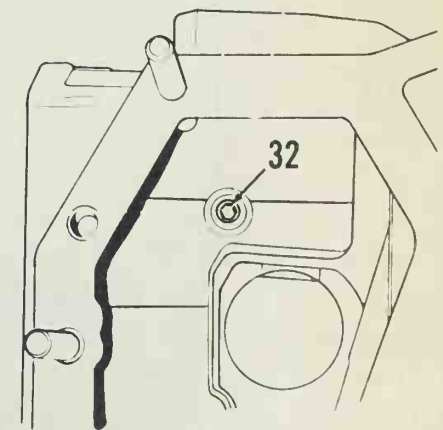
View showing location of socket head screw (32) in pto crankcase section.
